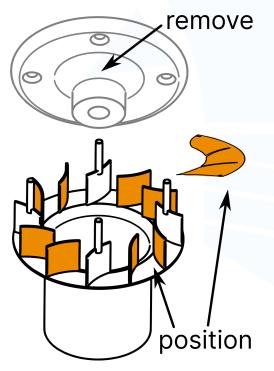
Assembly of previously welded parts. Use the centring tool (orange).
